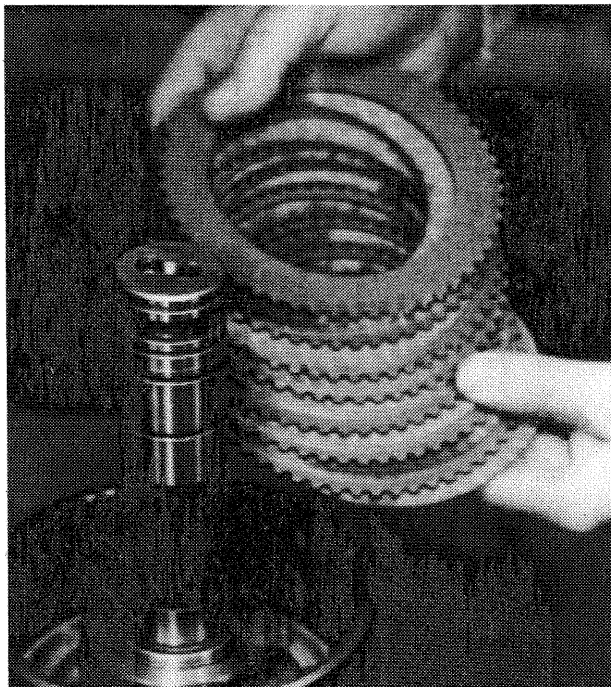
Disassembly of the Clutch (1 of 3)
